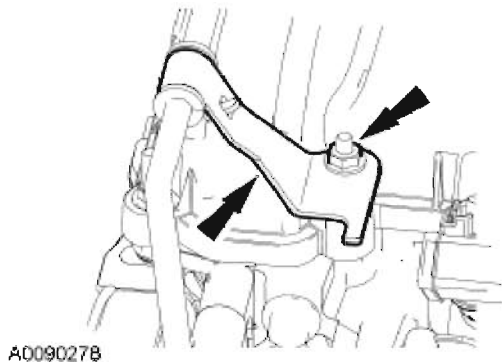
Locating Fuel Vapor Return Tube & Retainer
